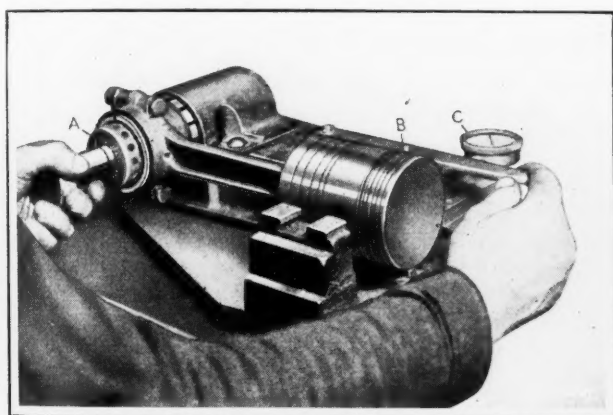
Inspecting the Squareness of a Piston Wall Relative to the Crank Bearing of the Connecting-rod
